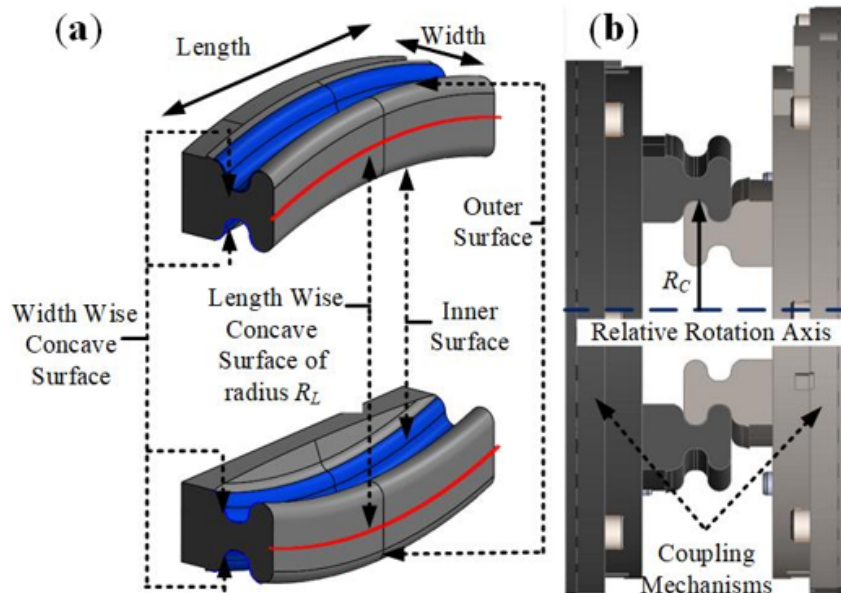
H-grooved clamping profiles (a) Isometric view of clamping profiles. (b) Side view of two docked coupling mechanisms [28]
